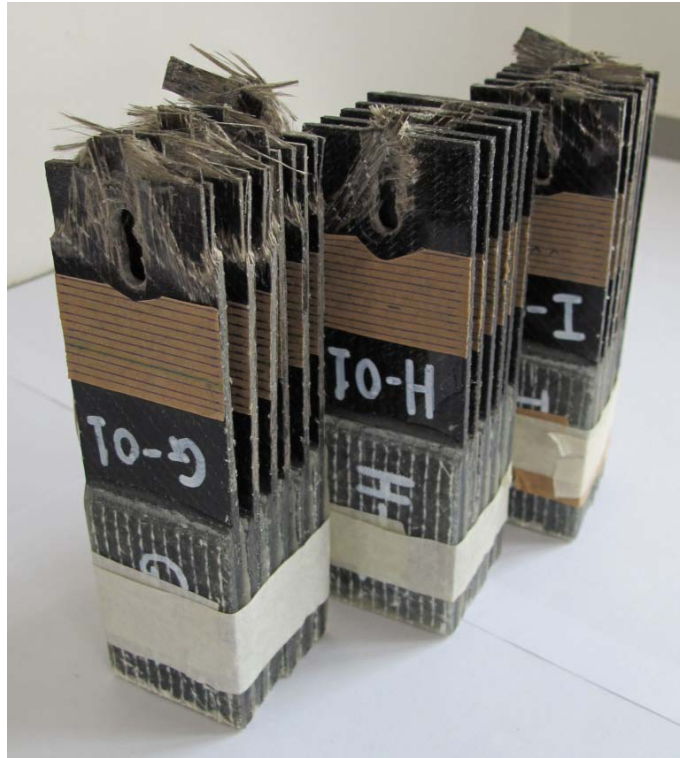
Three different damage mechanisms in the laminates, types G, H and I, after the pin bearing strength tests, side view.
